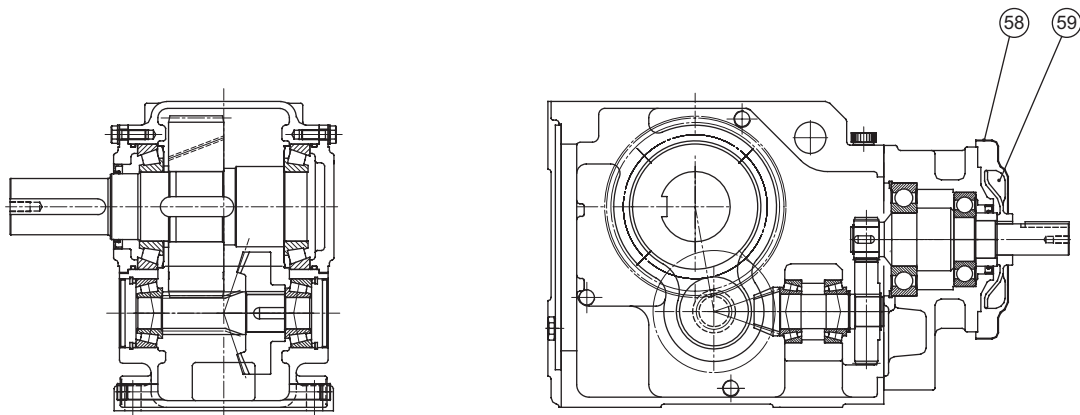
Foot Mount Type Reducer (Example: KHH-115R-K1)
